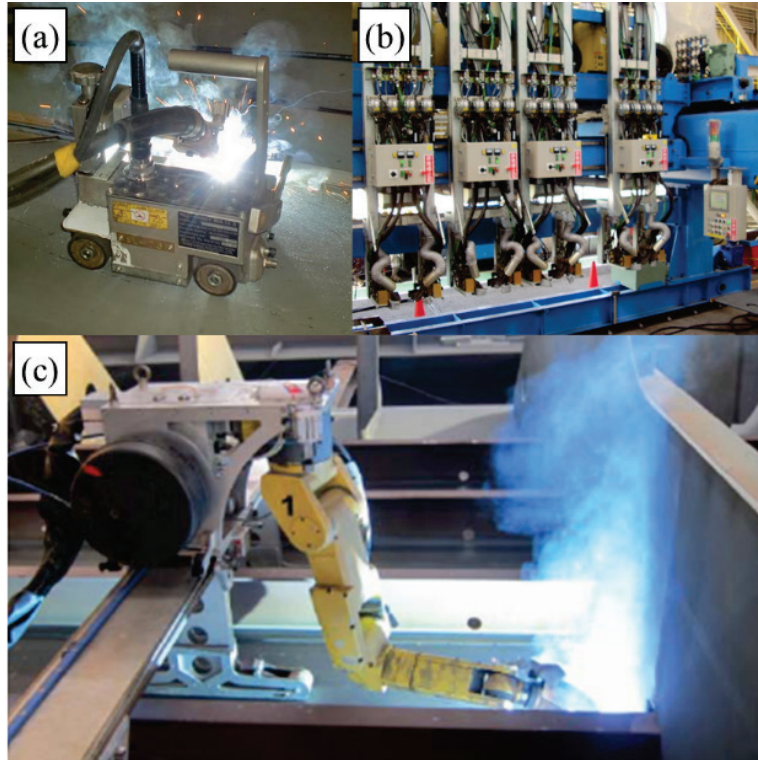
Examples of automatic welding machines used in ship construction processes.
